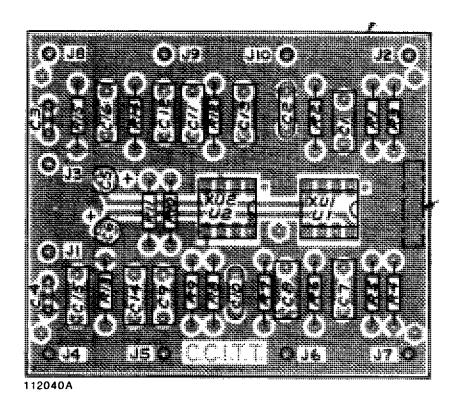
CCITT Board A1A31 Parts Location Diagram.
